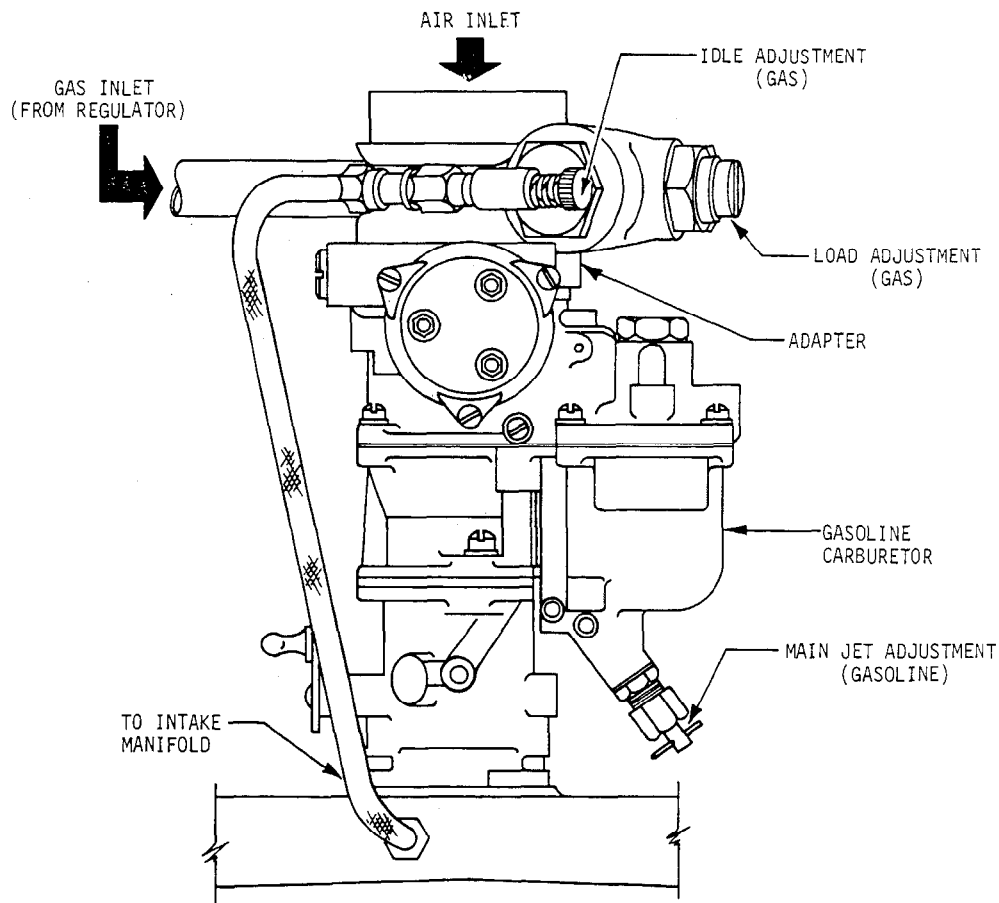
GASOLINE CARBURETOR WITH GAS ADAPTER
